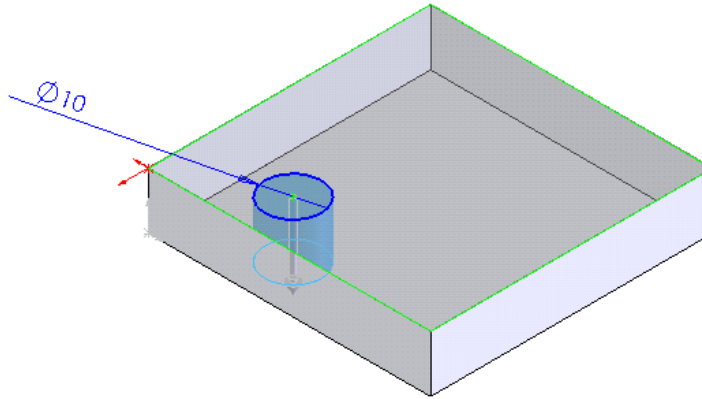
Preview of the hole being created using the Simple Hole option
